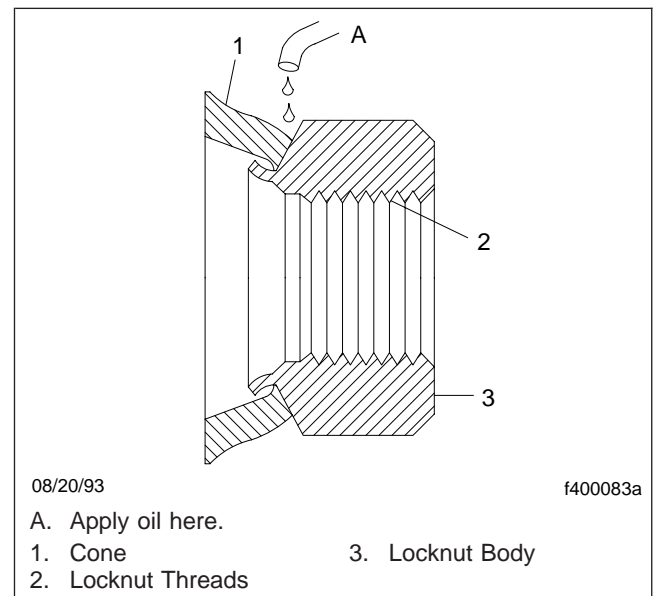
, Cone Locknut Lubrication (8-hole disc wheels)
